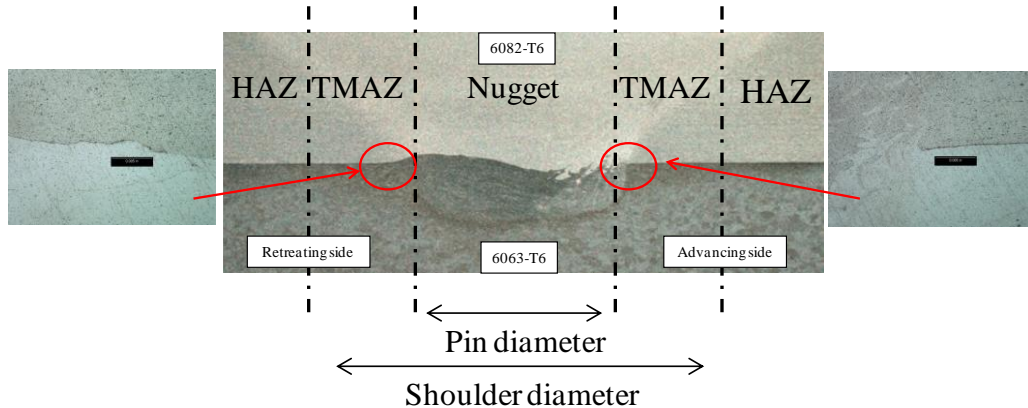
Macrostructure of dissimilar joint presenting weld regions, and close-up of advancing and retreating sides with no hook defect.
